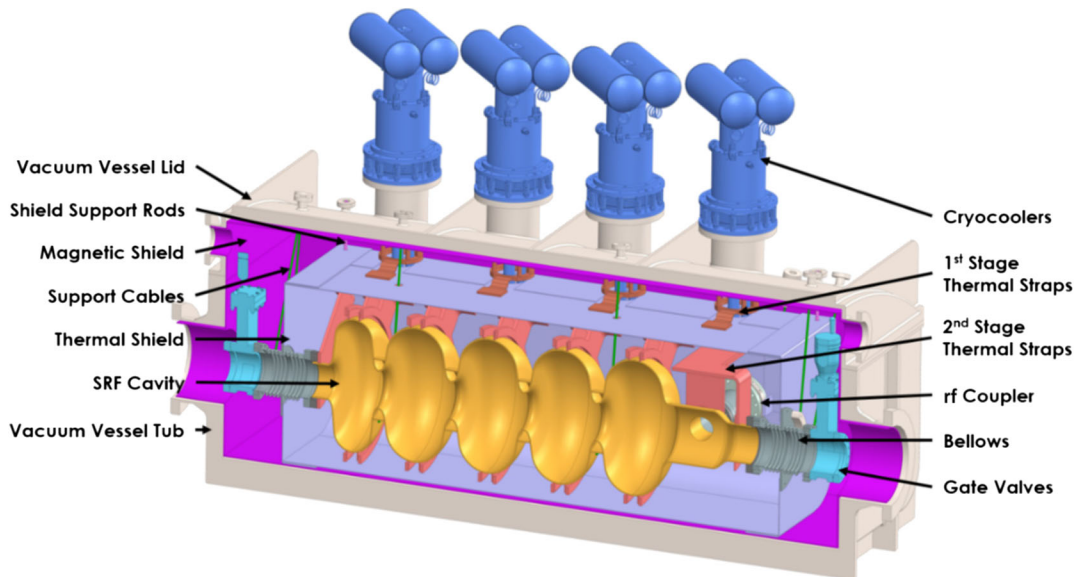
Cross-section view of the SRF cryomodule assembly. The end-to-end length is 1.95 m.
